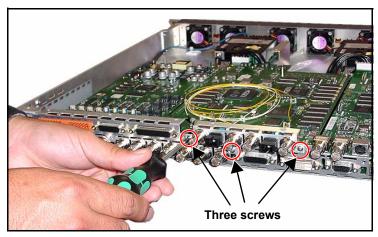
Removing HDTV Back Module Screws (X75OPT-HDUPG Module Shown)
